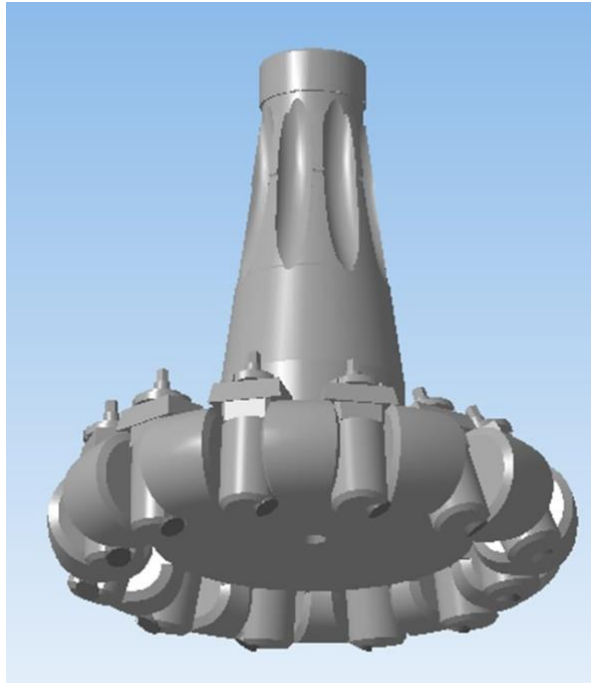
General view of the adjustable square shoulder face mill for high-tensile steels machining [27]
